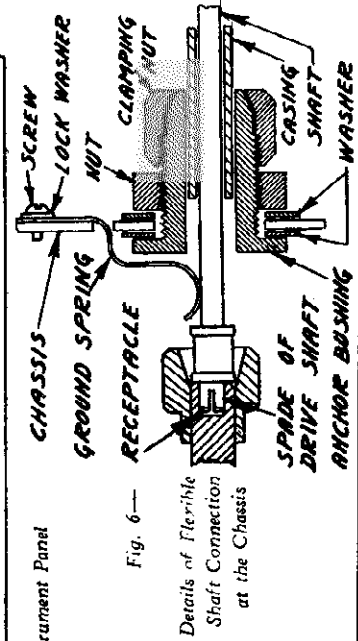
Details of Flexible Shaft Connection at the Chassis
